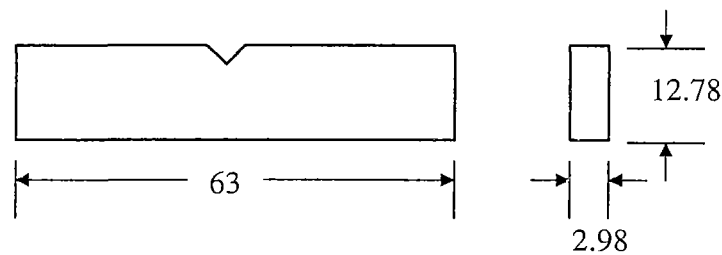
Izod impact test specimen (all dimensions are in mm).
